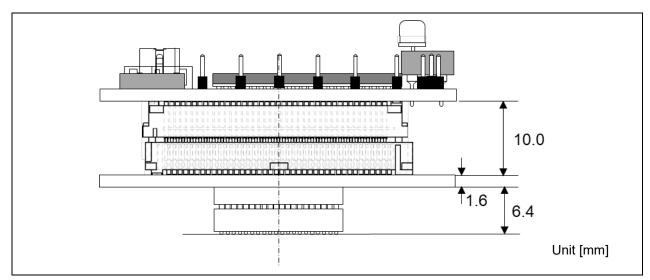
Drawing of the Assembly for the RTE7702540CBG292T000J (292 Pins)
